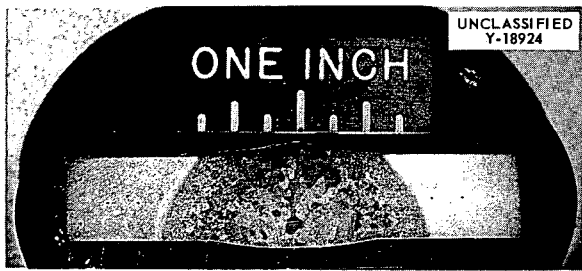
Macrograph of Multipass Weld in Zircaloy-2 Plate.
